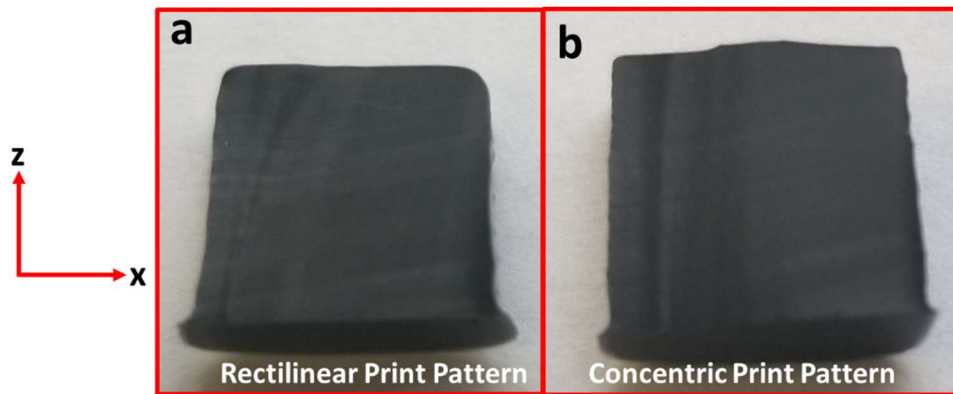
Cross section of 3D printed samples using the (a) rectilinear and (b) concentric printing patterns.
